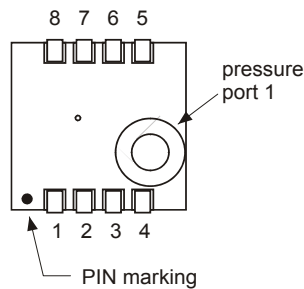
below gives the pinout and dimensions of the dual-in-line package.
